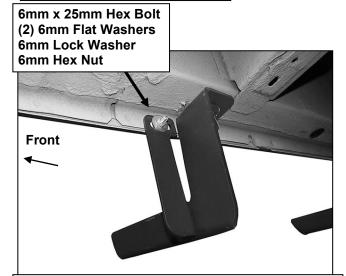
Passenger/right front Mounting Bracket and Support Bracket illustrated
